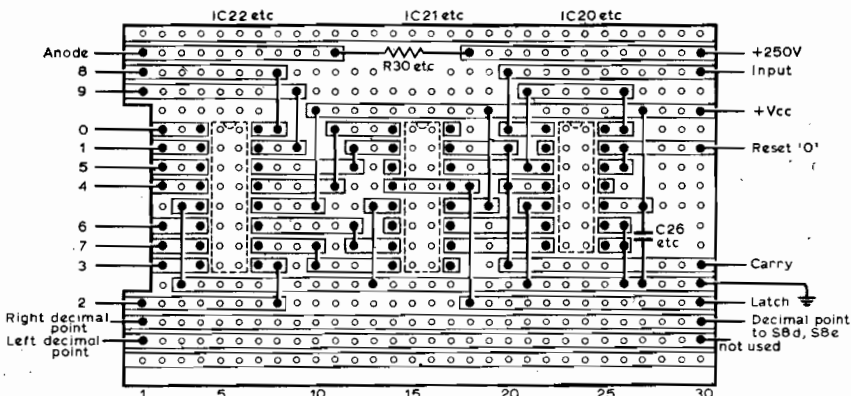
The display panel for cold cathode indicating tubes. Five of these are required
